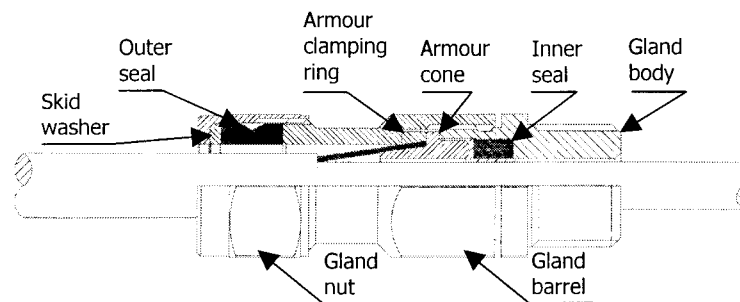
Sectional Drawing of a Typical RTFL Gland
